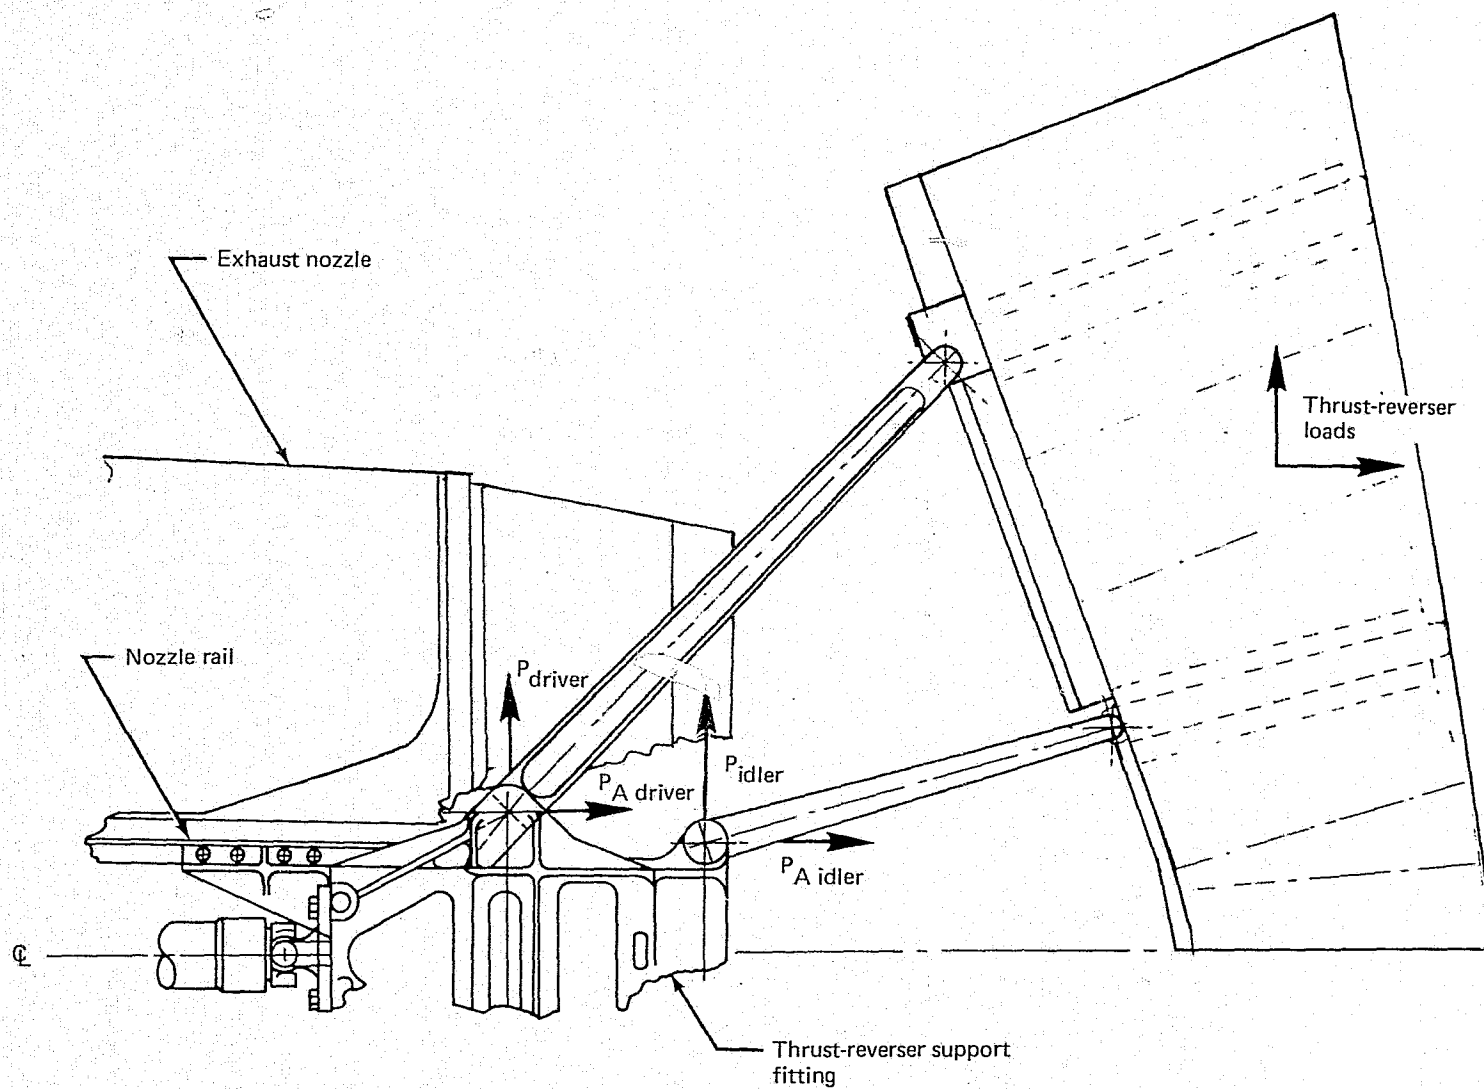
JT8D Refan Exhaust Duct Assembly—Thrust Reverser Loads Applied to Support Fitting
